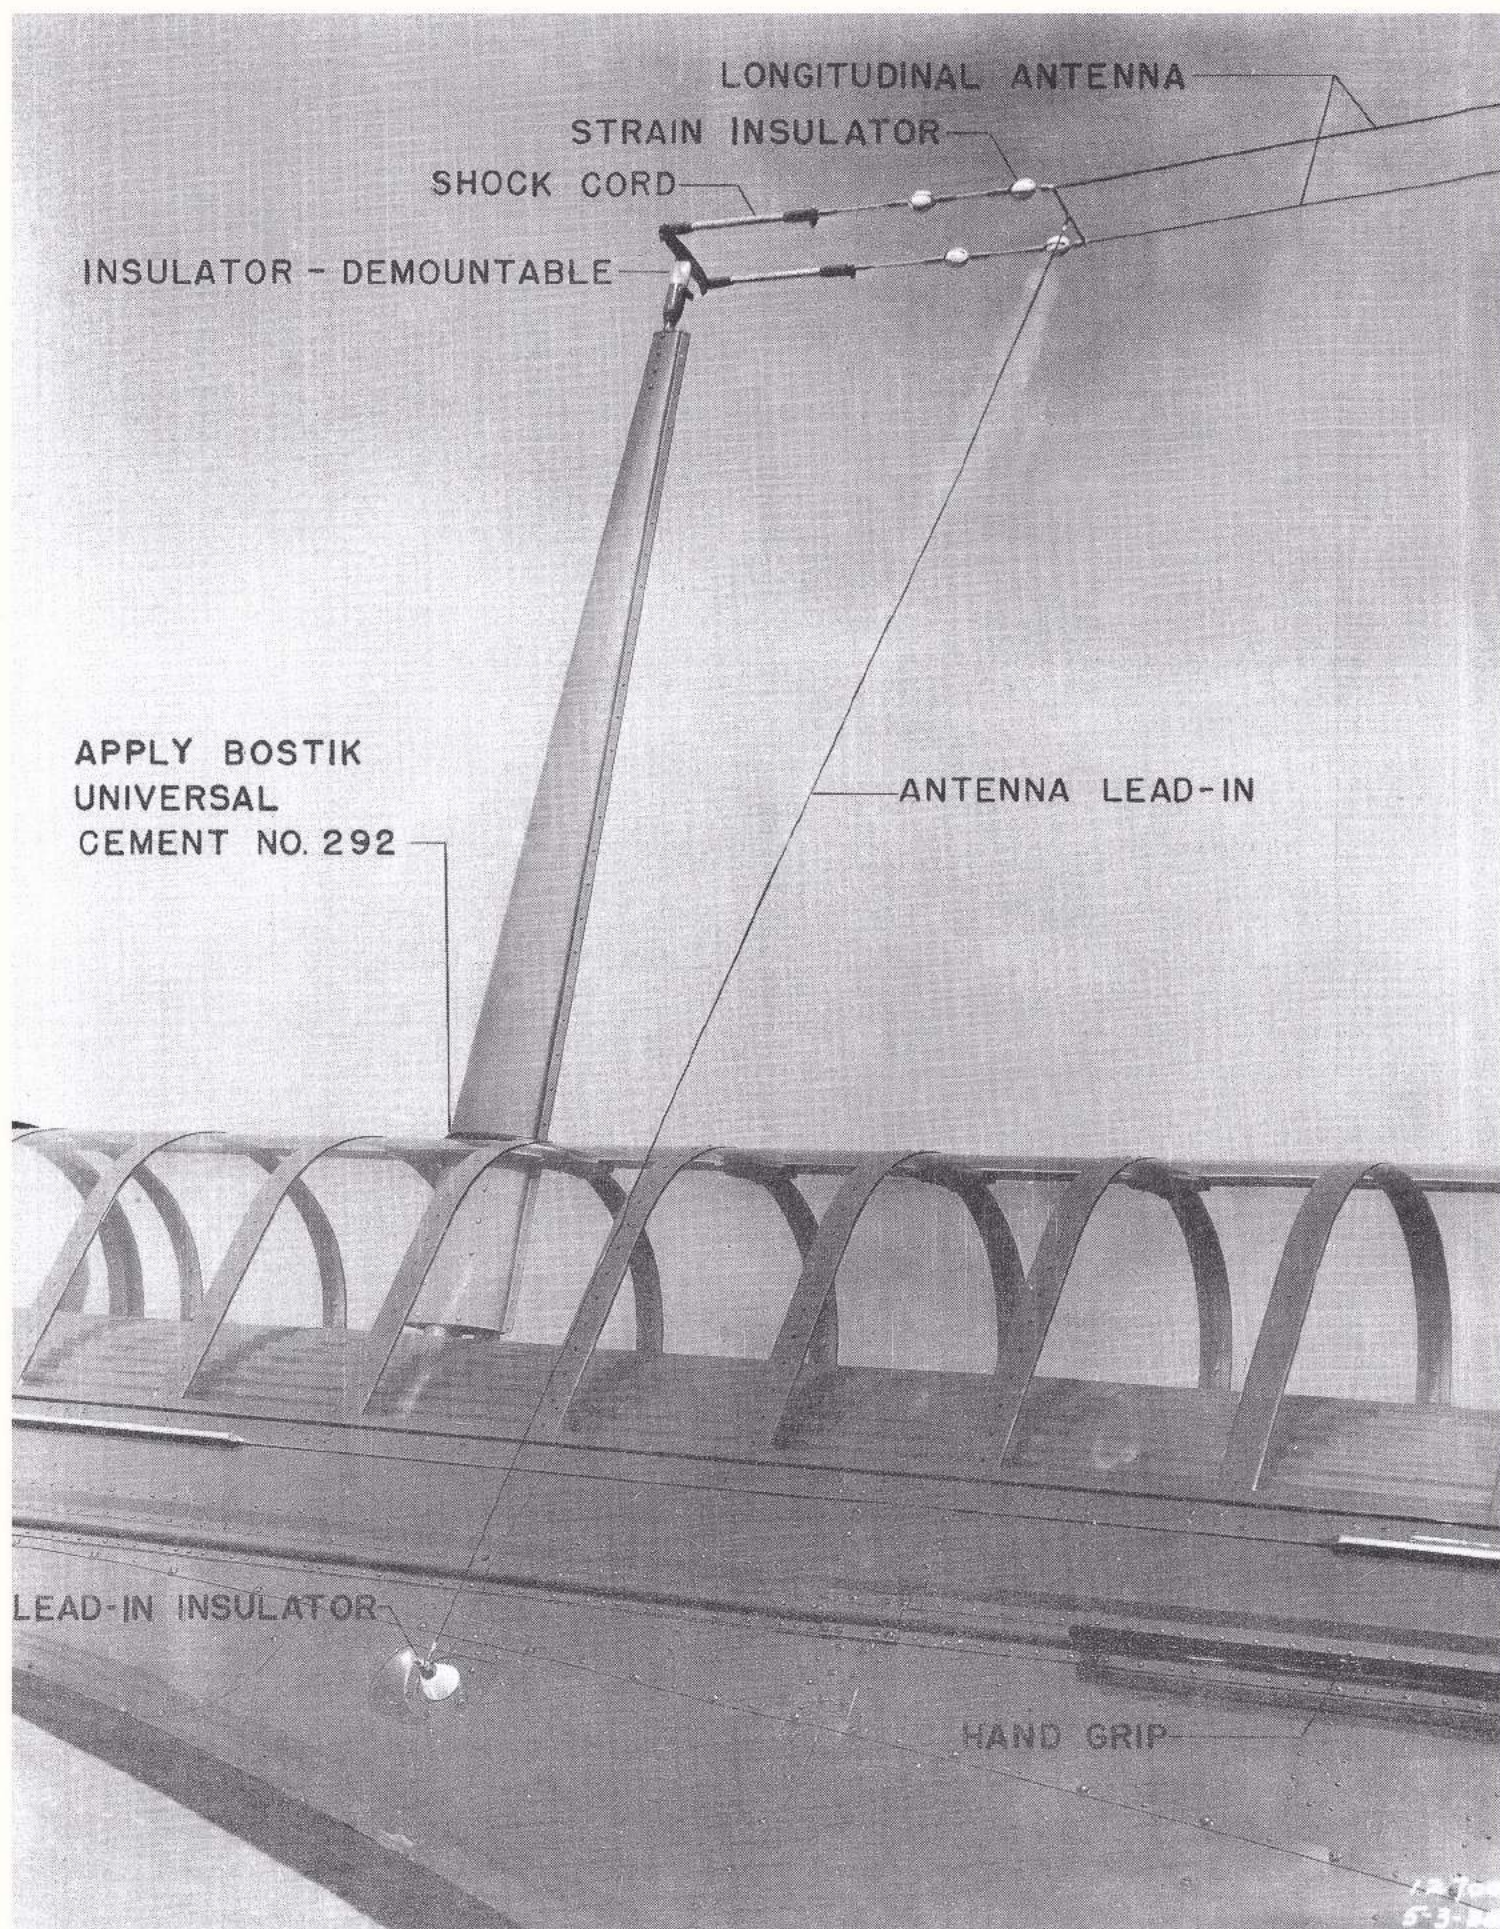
RADIO EQUIPMENT - EXTERNAL INSTALLATION
